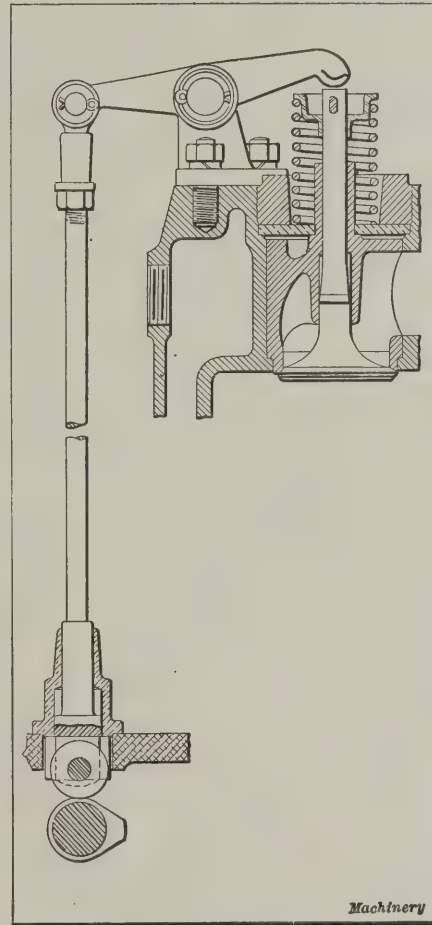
Section through Valve of a Poppet Valve Engine of the Overhead Type
